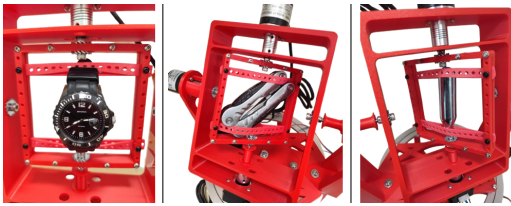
A watch (left), a multitool (middle) and a CO2 canister (right) secured using the universal mounting fixture.
